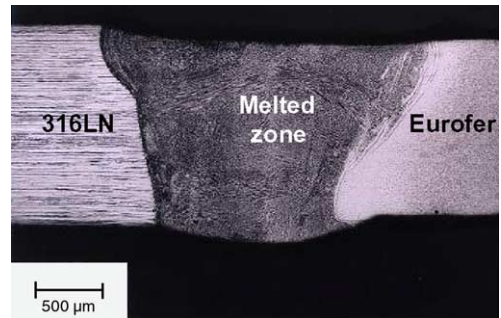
Macrograph of a Eurofer/316LN tube EB weld, 1.5 mm thick.
